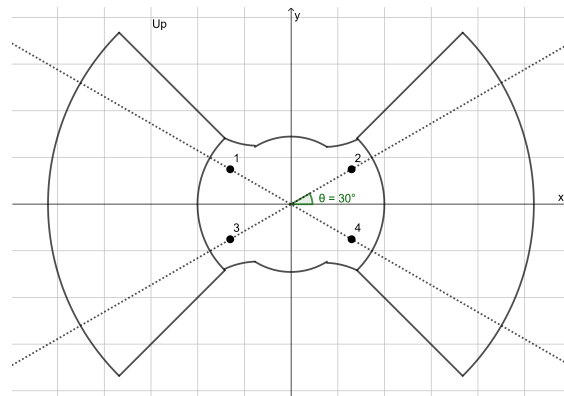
Circular metal plate layed on the up face of the rotor with four screw holes and the photodiode hole visible.
